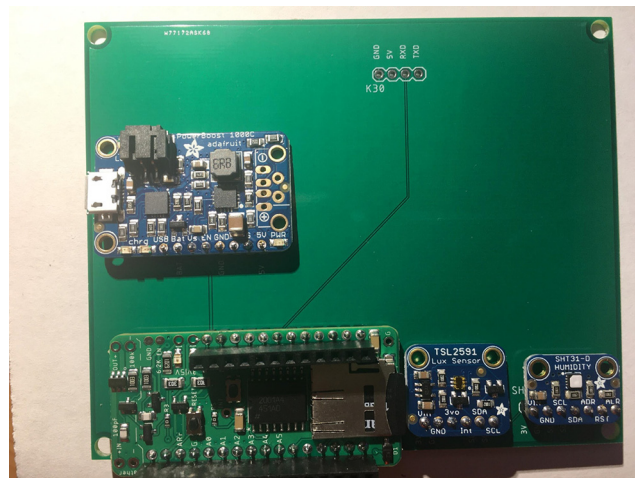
Top view after soldering the PowerBoost to the PCB.
